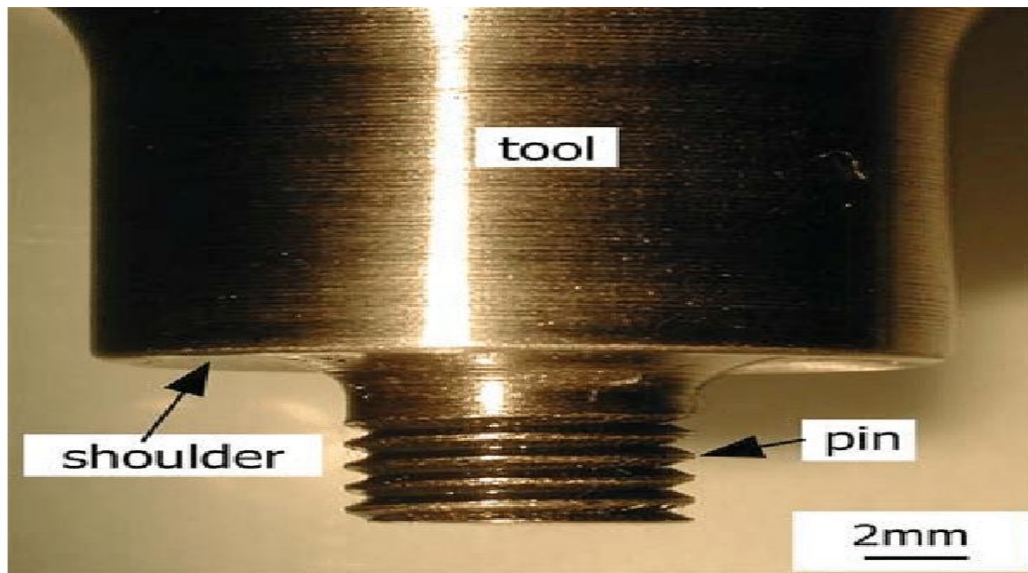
Parts of friction stir welding tool [78].
